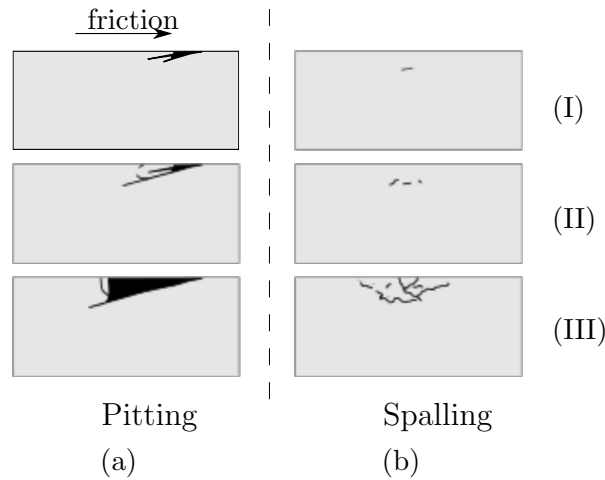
Mechanism of (a) surface initiated pitting and (b) subsurface initiated spalling.
